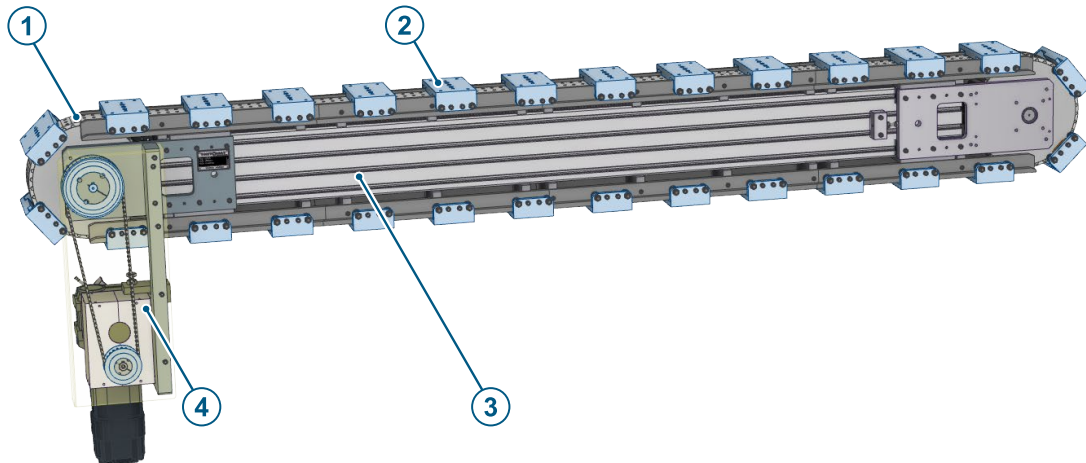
RFA linear transfer system Belt transmission (toothed belt gear( $i$  = variable), worm gear and motor)
